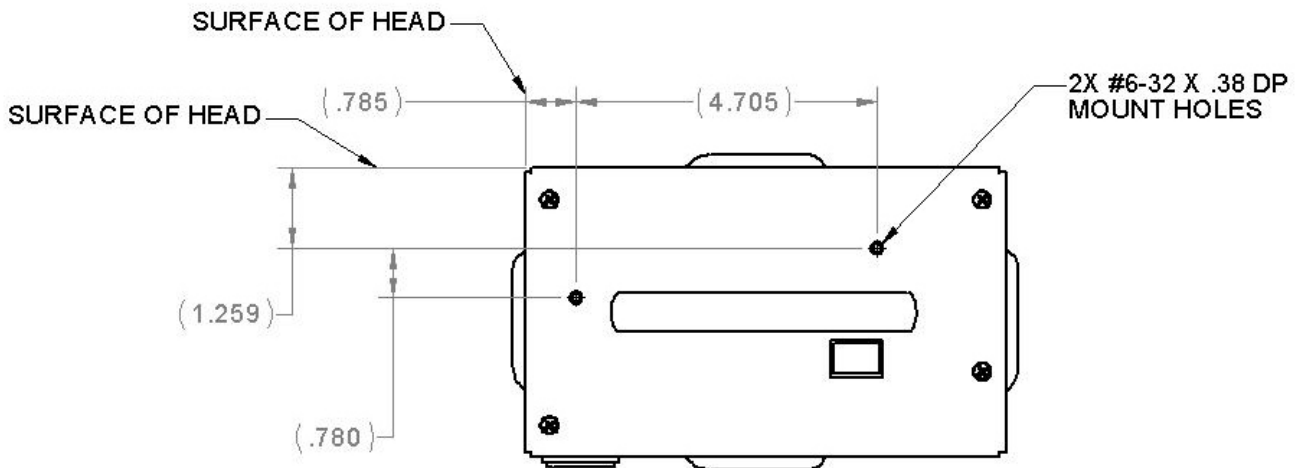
, PortaRay lamp head mounting hole dimensions (in inches).
